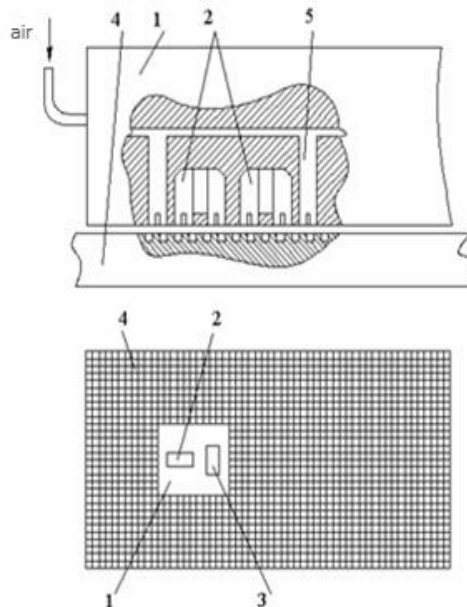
Coordinate table with a linear stepper motor: a) structural diagram; b) coordinate table with combined stator cutting: 1 - movable carriage, 2 - linear stepper motor of the X axis, 3 - linear stepper motor of the Y axis, 4 - stator, 5 – nozzles
